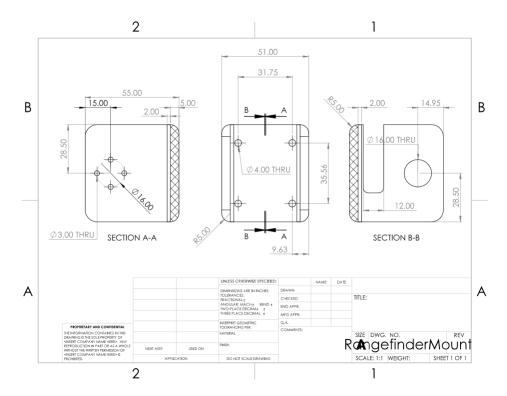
RANGEFINDER MOUNT (DIMENSIONS IN INCHES)
